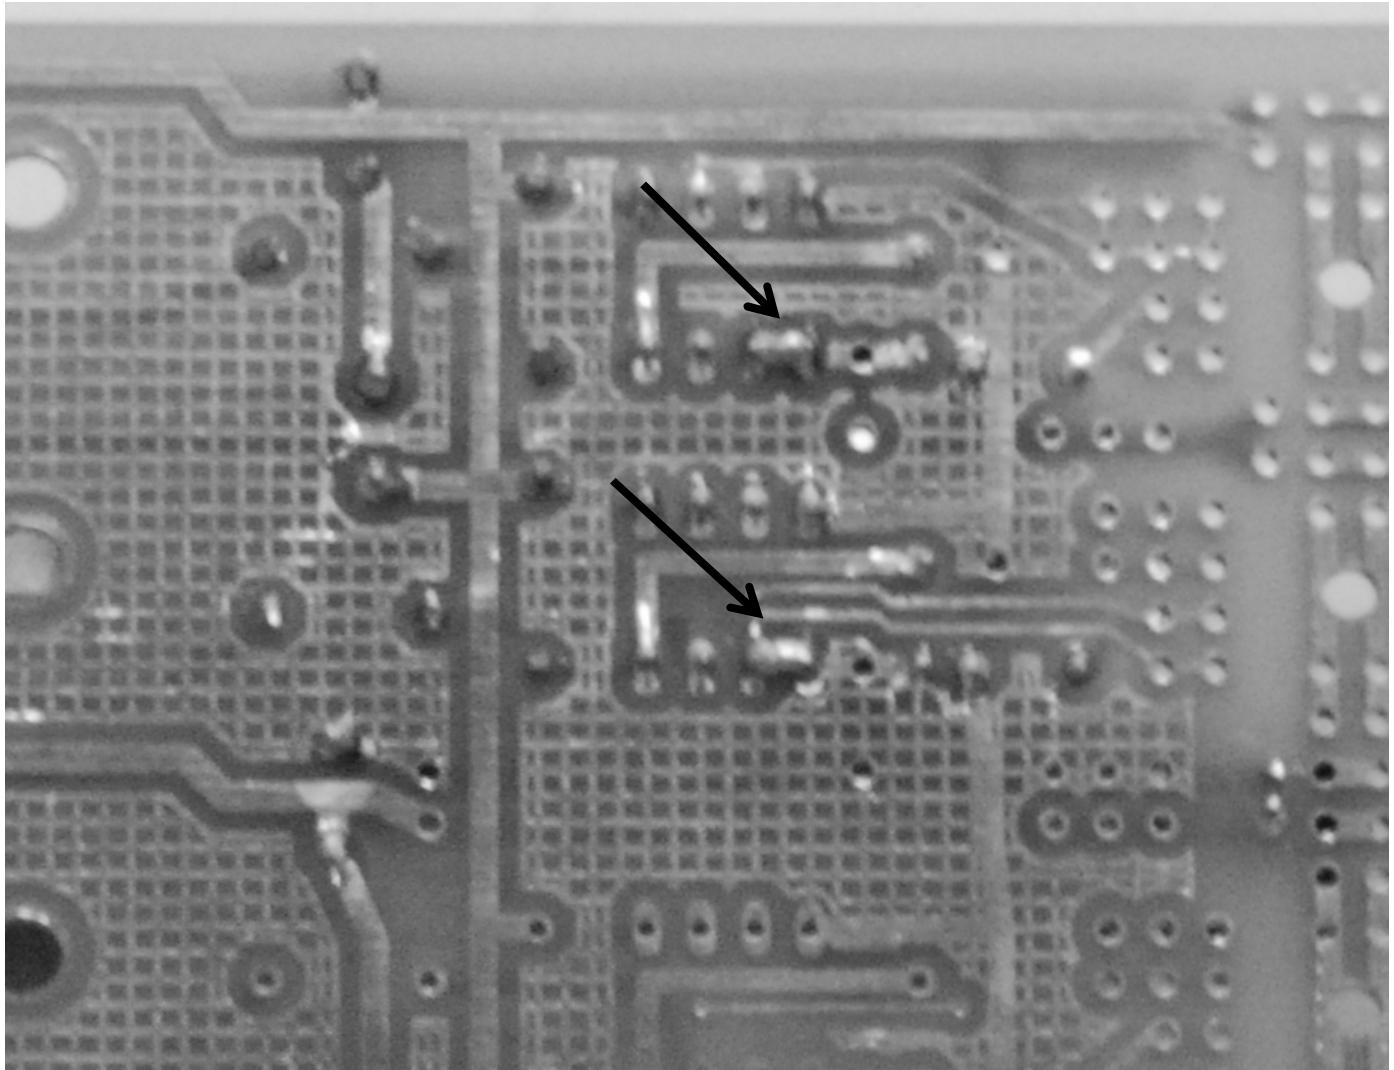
Solder Bridge on Bottom of PCB (the fingers of the PCB are to the left)
